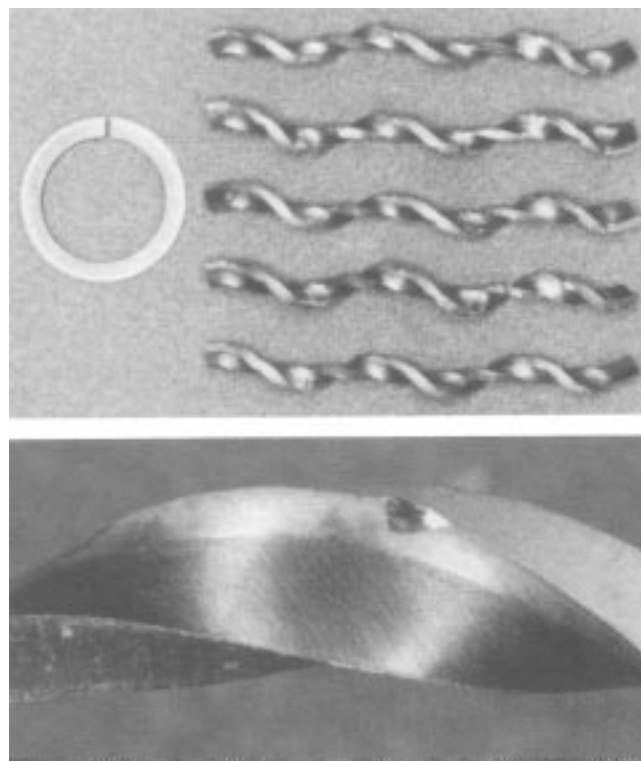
Before and after views of twist test rings. Upper: a slotted, but untested, ring and five tested rings, taken from three annealed 51-mm (2-in.) tubes, 0.43×. Lower: close-up of ring 3B; dimples represent pressure points for the 9th and 10th 90° twists. 3.3×
